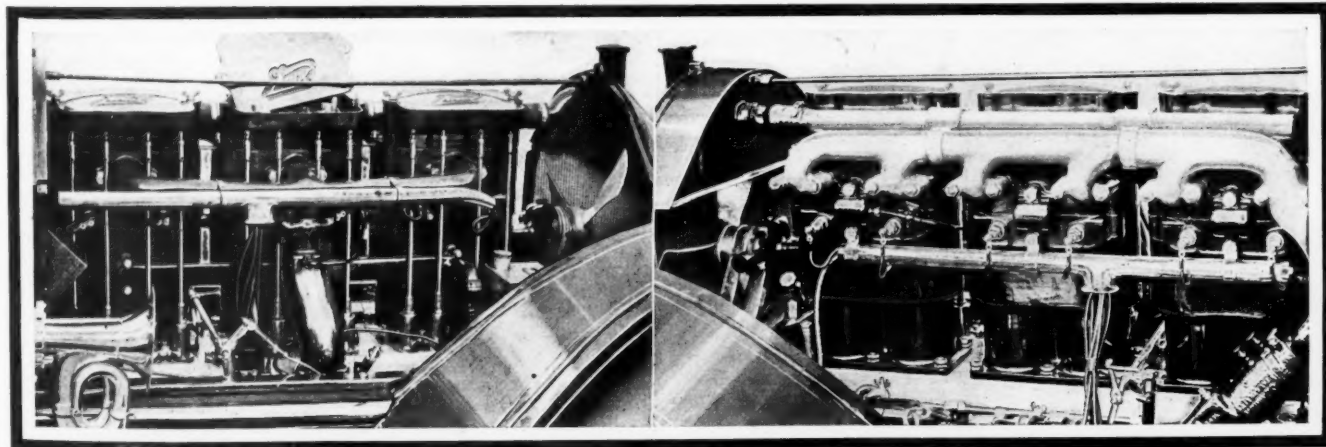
Showing the right and left sides of the motor as exposed to view when the hood is lifted
